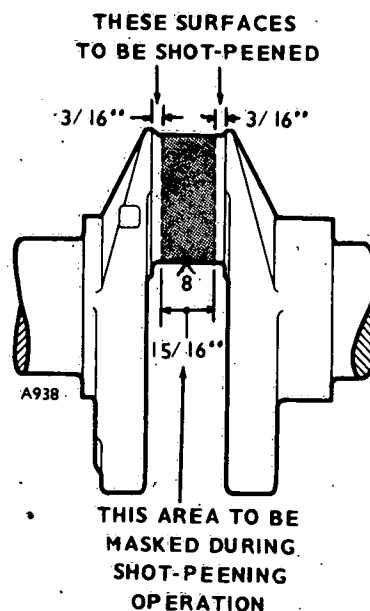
SHOT-PEENING THE CRANKSHAFT
